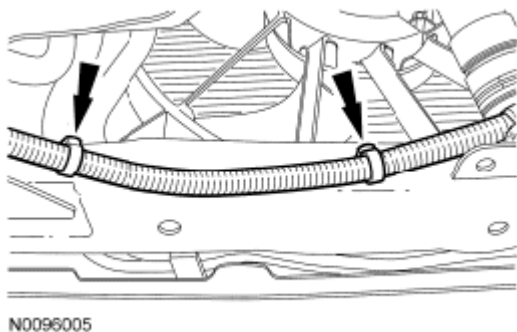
Locating EPAS System Wiring Harness Pin-Type Retainers
